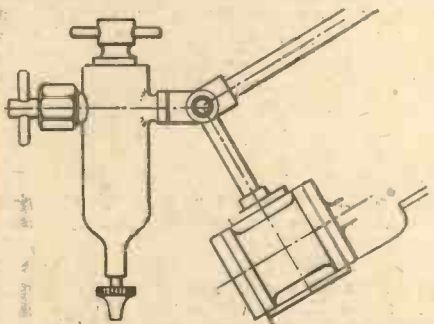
The displacement cylinder lubricator and its attachment to the steam pipe.
